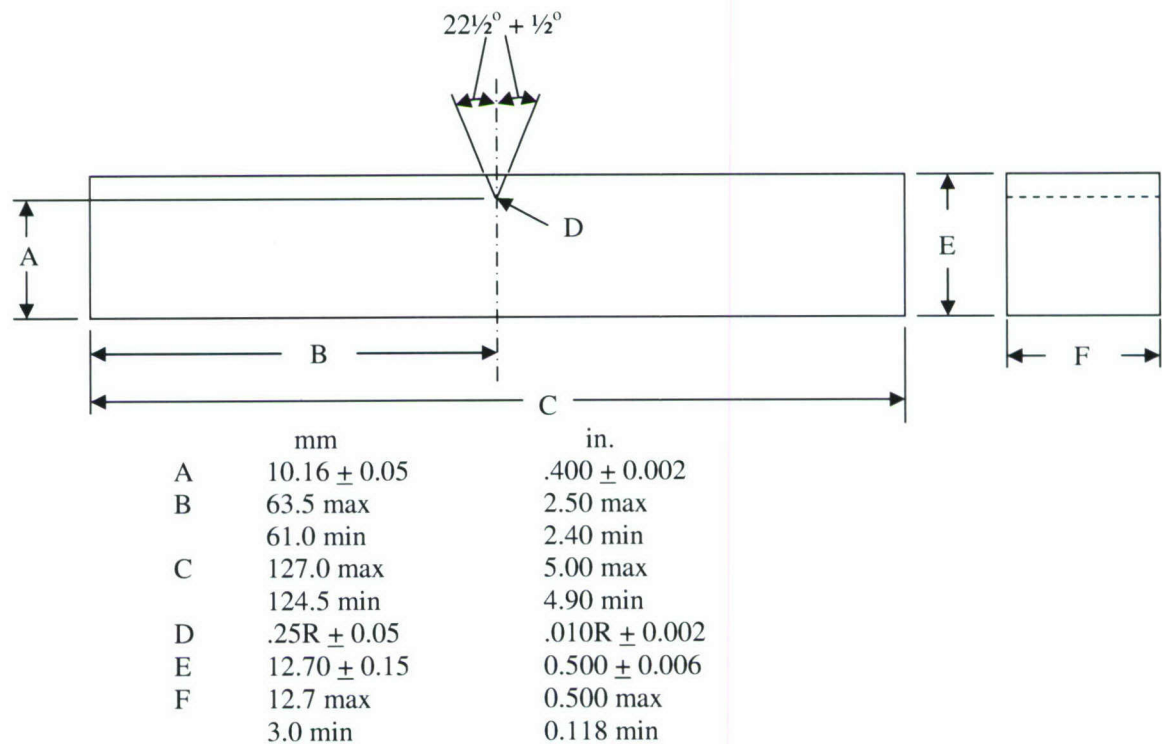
Dimensions of simple beam, Charpy type, impact test specimen (ASTM D 6110-06.)
